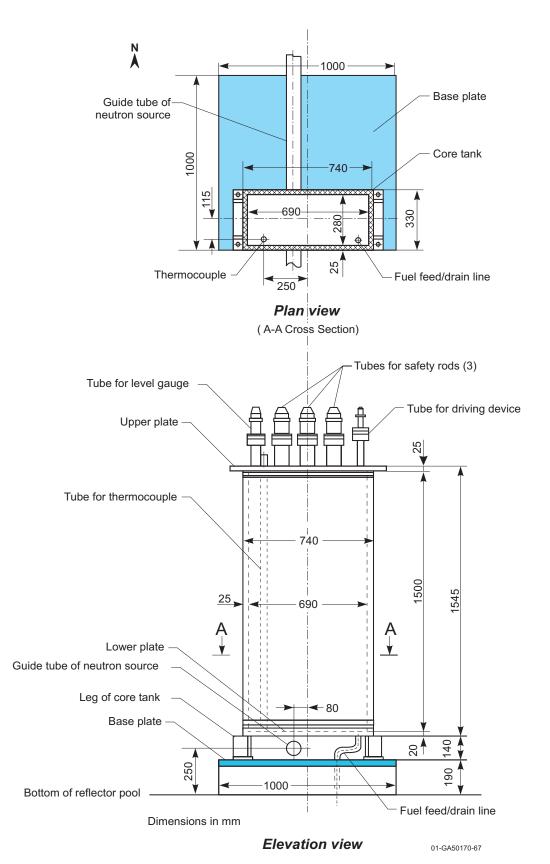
Schematic View of STACY Core Tank. (design dimensions)
